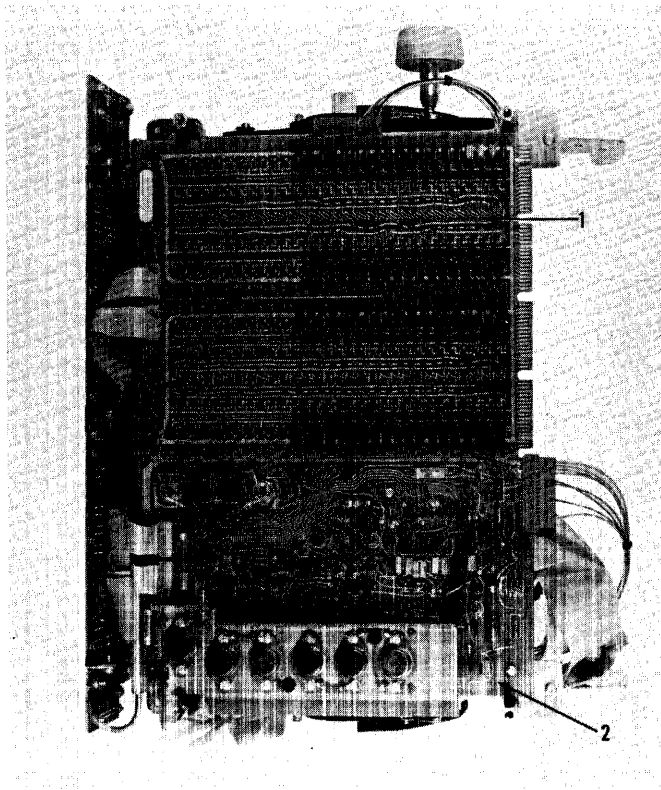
Frame Assembly for TermiNet 300 A or B Printer (Bottom View)
